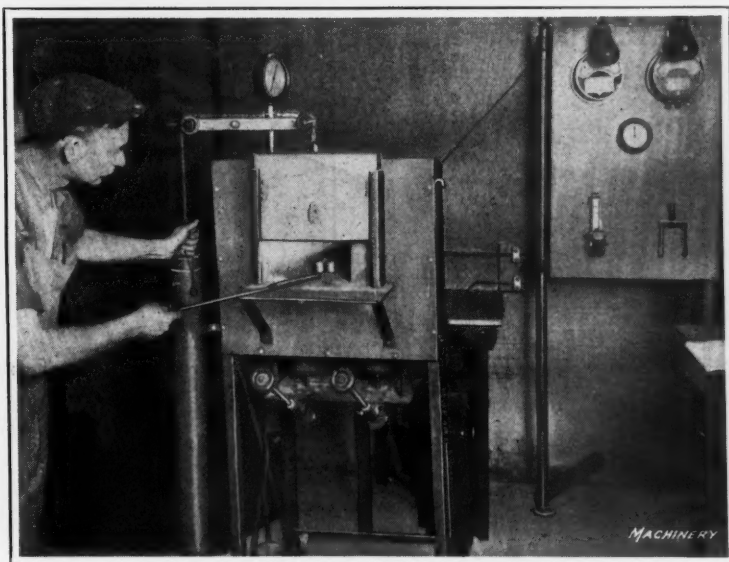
Furnace equipped with Indicating Pyrometers mounted on a Panel
